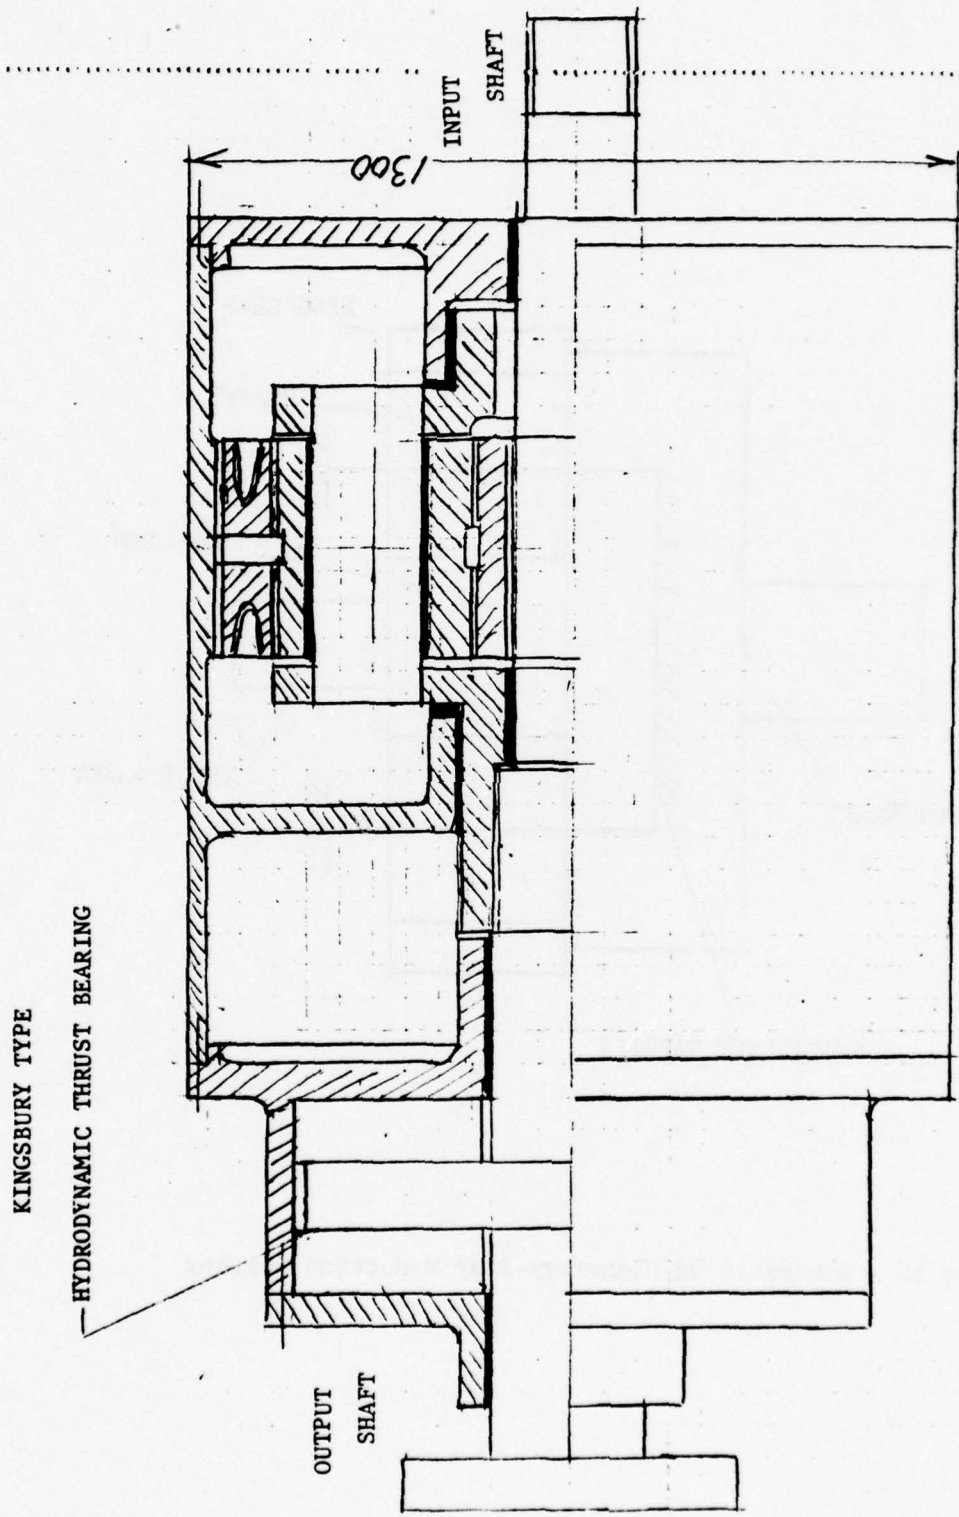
Schematic of Planetary Gearbox with Stationary Ring Gear
